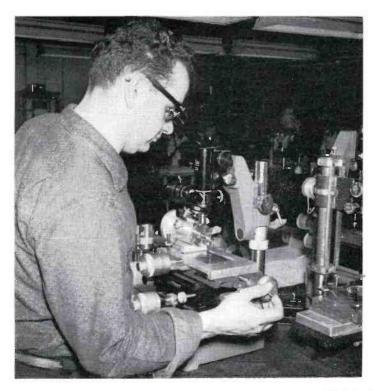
Here, pole tips are being inserted and cemented into head blocks prior to machining. This is the initial stage of head fabrication. Two of these blocks are joined together in the following process to form α single video head.
